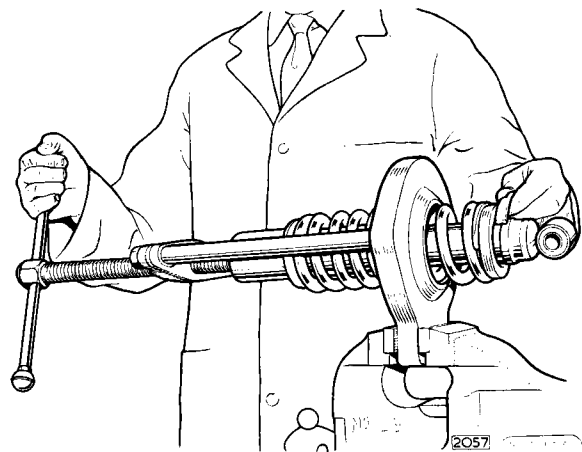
Removing the rear road spring from the hydraulic damper with Churchill Tool No. J.11 A in conjunction with SL.14
